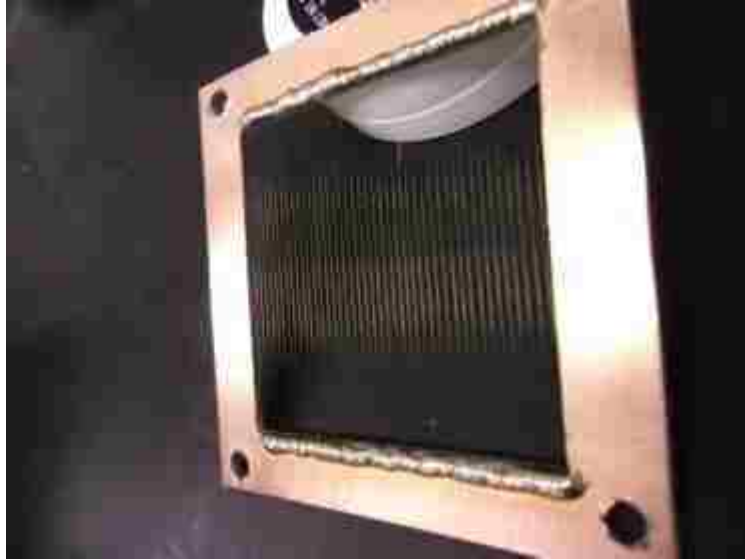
Au-W parallel wire array soldered to an acceleration grid frame
